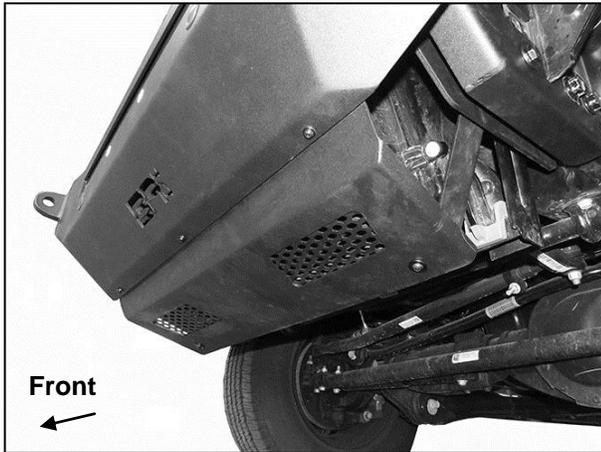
Attach driver/left side of Bumper to Frame Brackets. Inner Bracket illustrated
